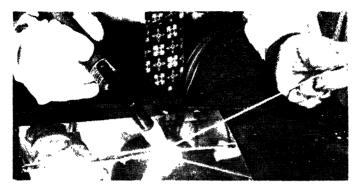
An inert gas arc weld. Note the position of the electrode holder and the filler rod. The material is aluminum.
